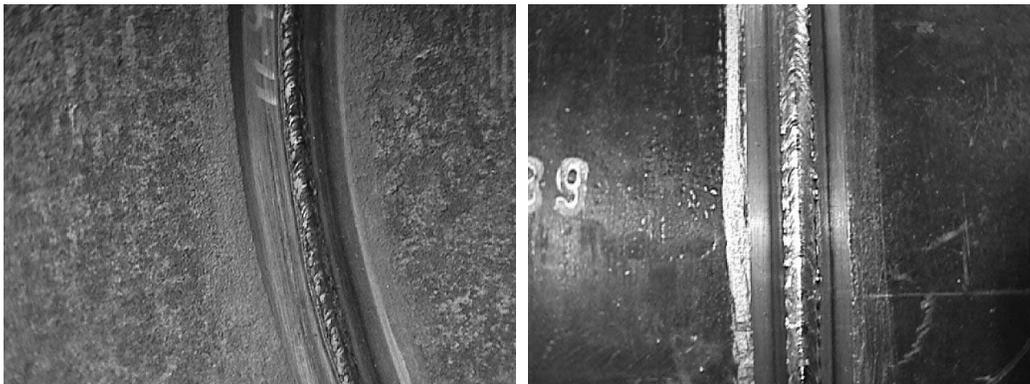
Typical appearance of root weld (ID and OD view).
